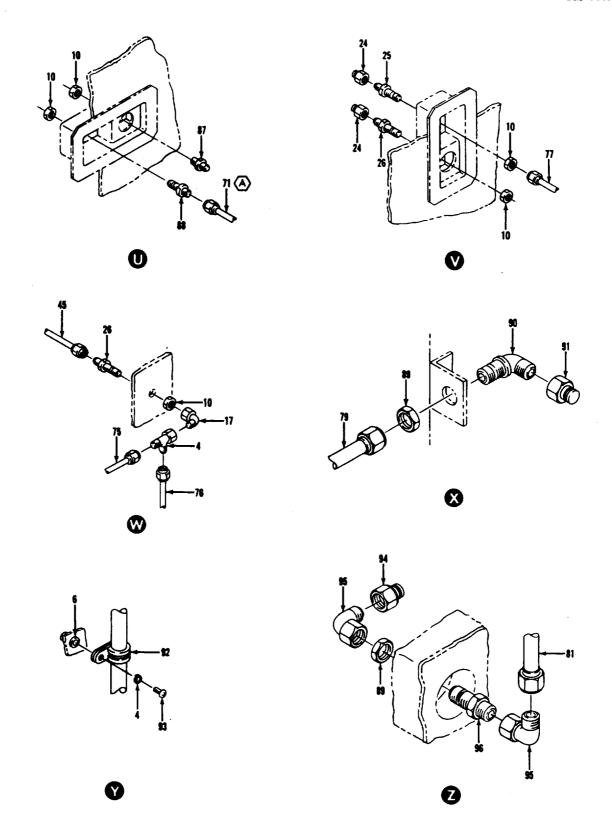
Tubing Installation (Sheet 8 of 17)
